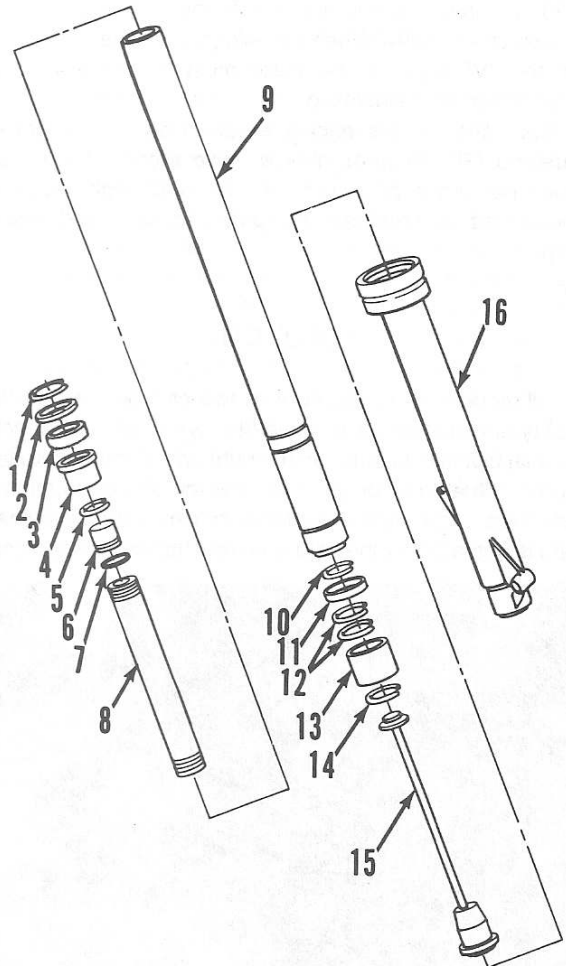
Exploded view of front fork assembly used on 200 cc models.
